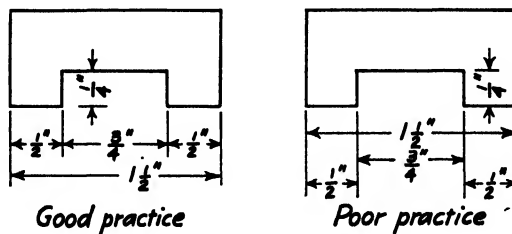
Show a series of dimensions in a continuous line. Also indicate the over-all dimension and place it on the outside.
